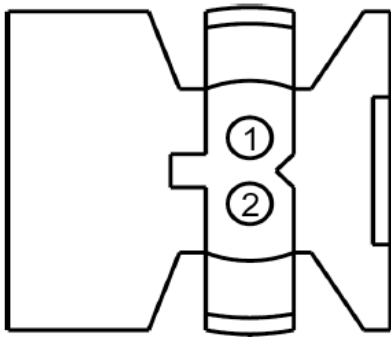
Passenger Seat Lumbar Motor Connector End View (C3216)
